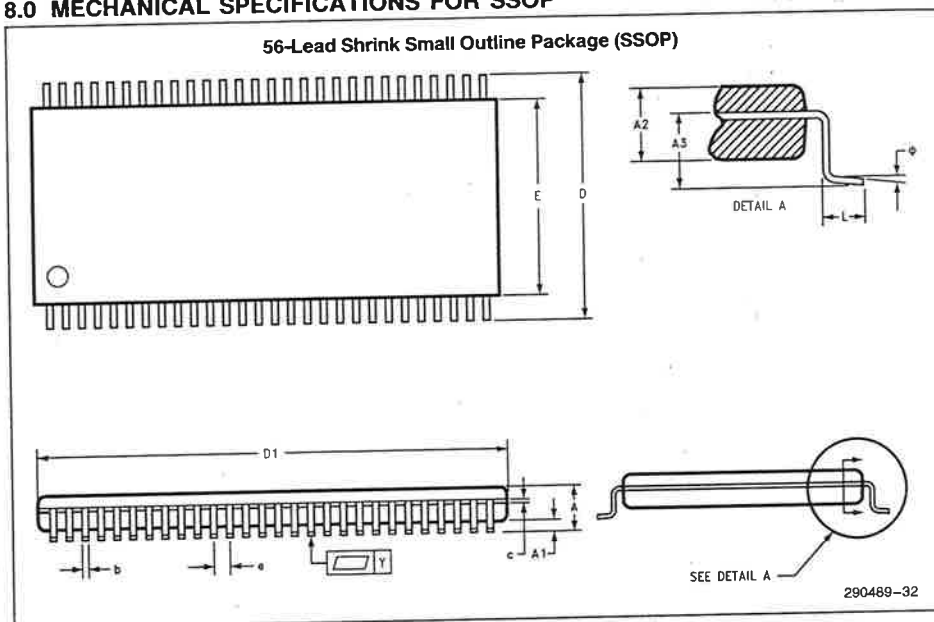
Mechanical Specifications of the 56-Lead SSOP Package
